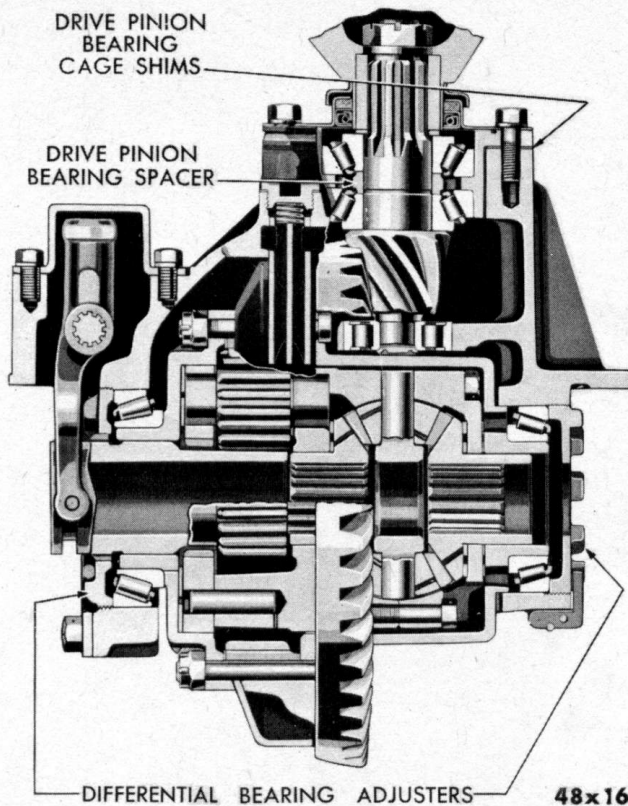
Rear Axle Differential, Two-Speed Spiral Bevel
